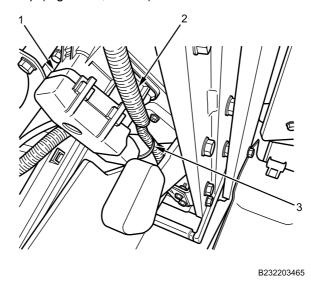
Windshield Wiper Motor Harness Routing On Bulkhead.
